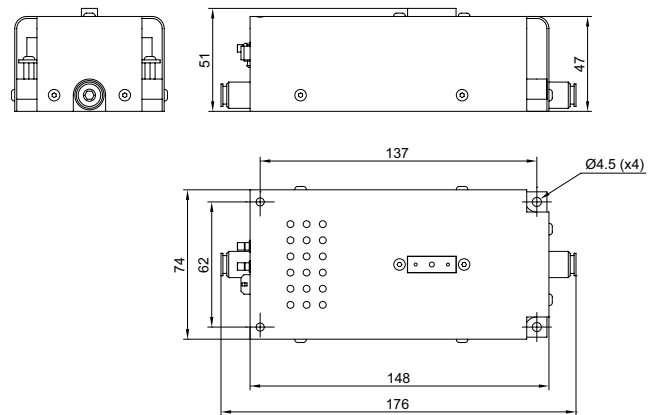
Outline drawing of encased version DPB2 series Pockels cell drivers
